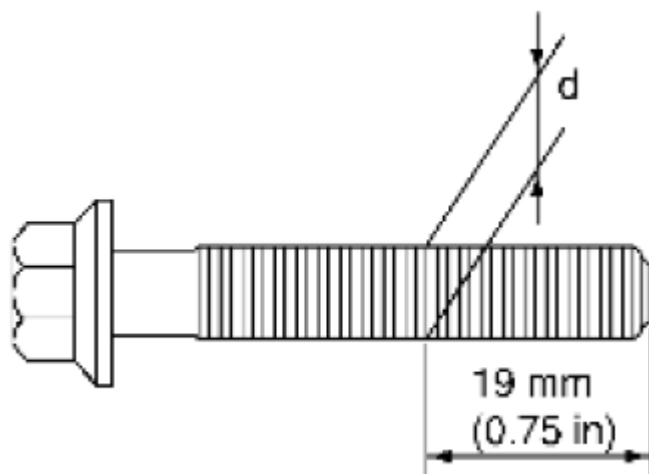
Identifying Connecting Rod Bolt Outer Diameter
